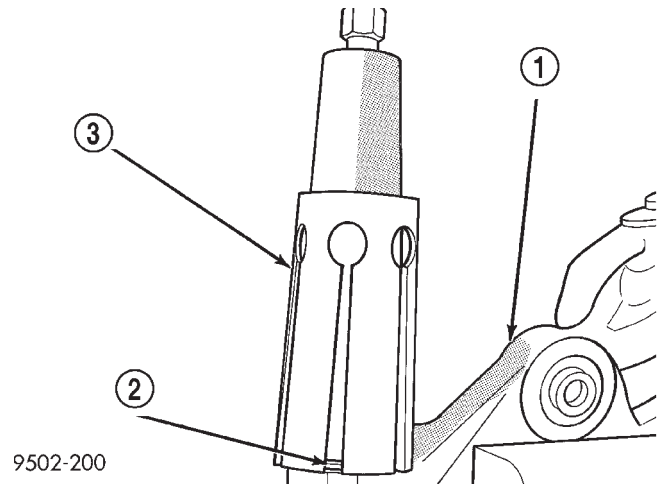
Retaining Ring Installed In Ball Joint Seal Boot
